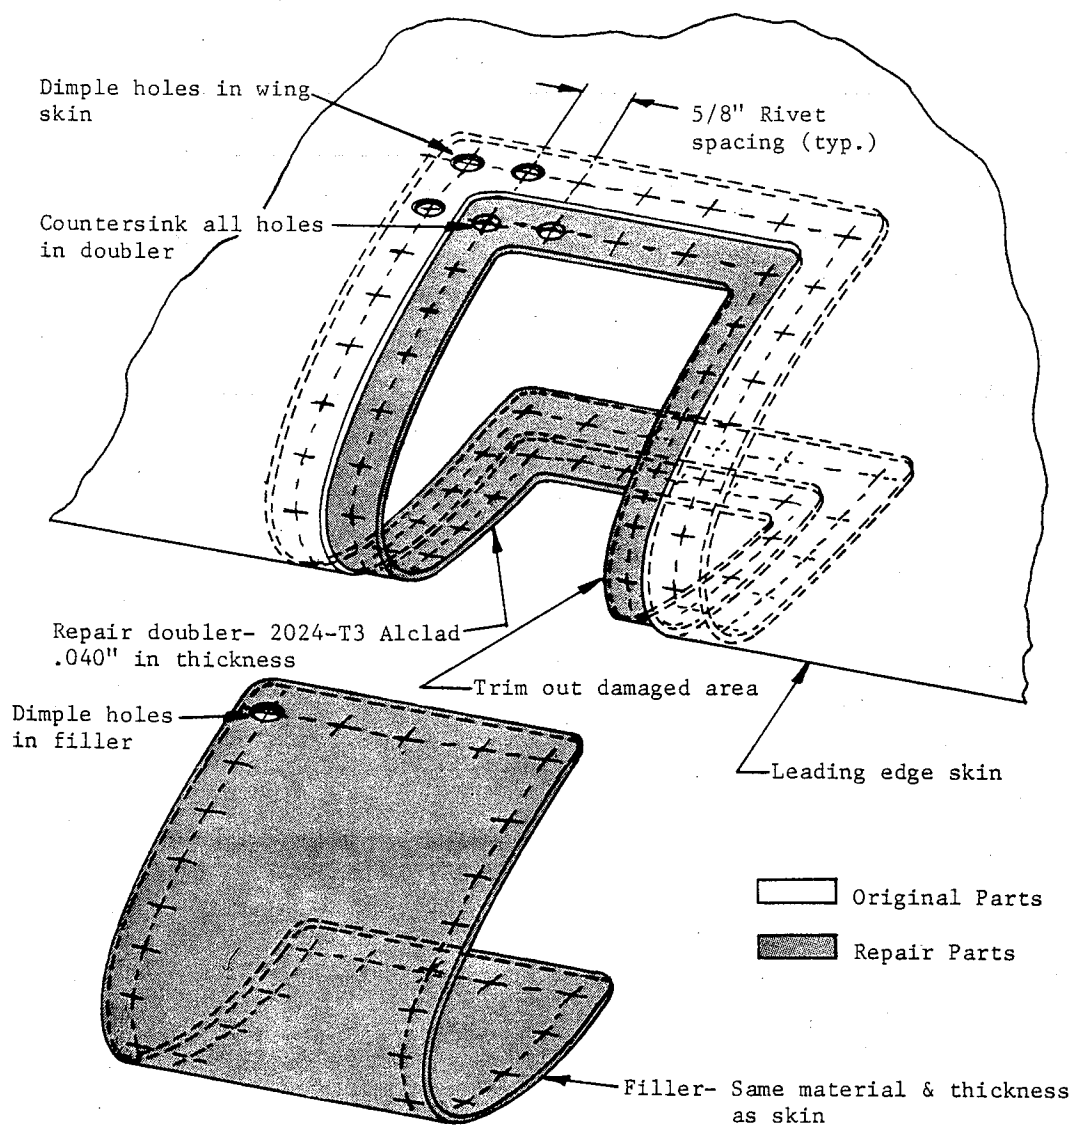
LEADING EDGE REPAIR ( RIVETED )
